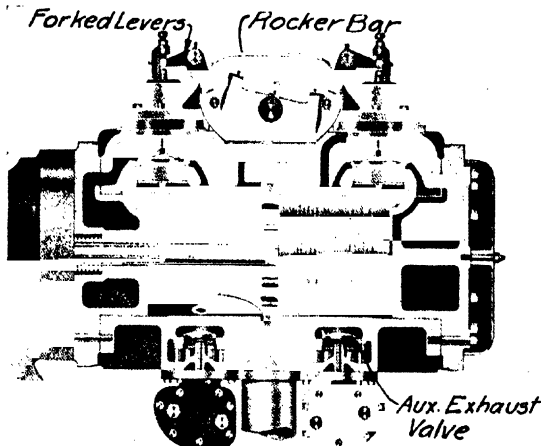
Cylinder of Skinner Unaflow Engine.
